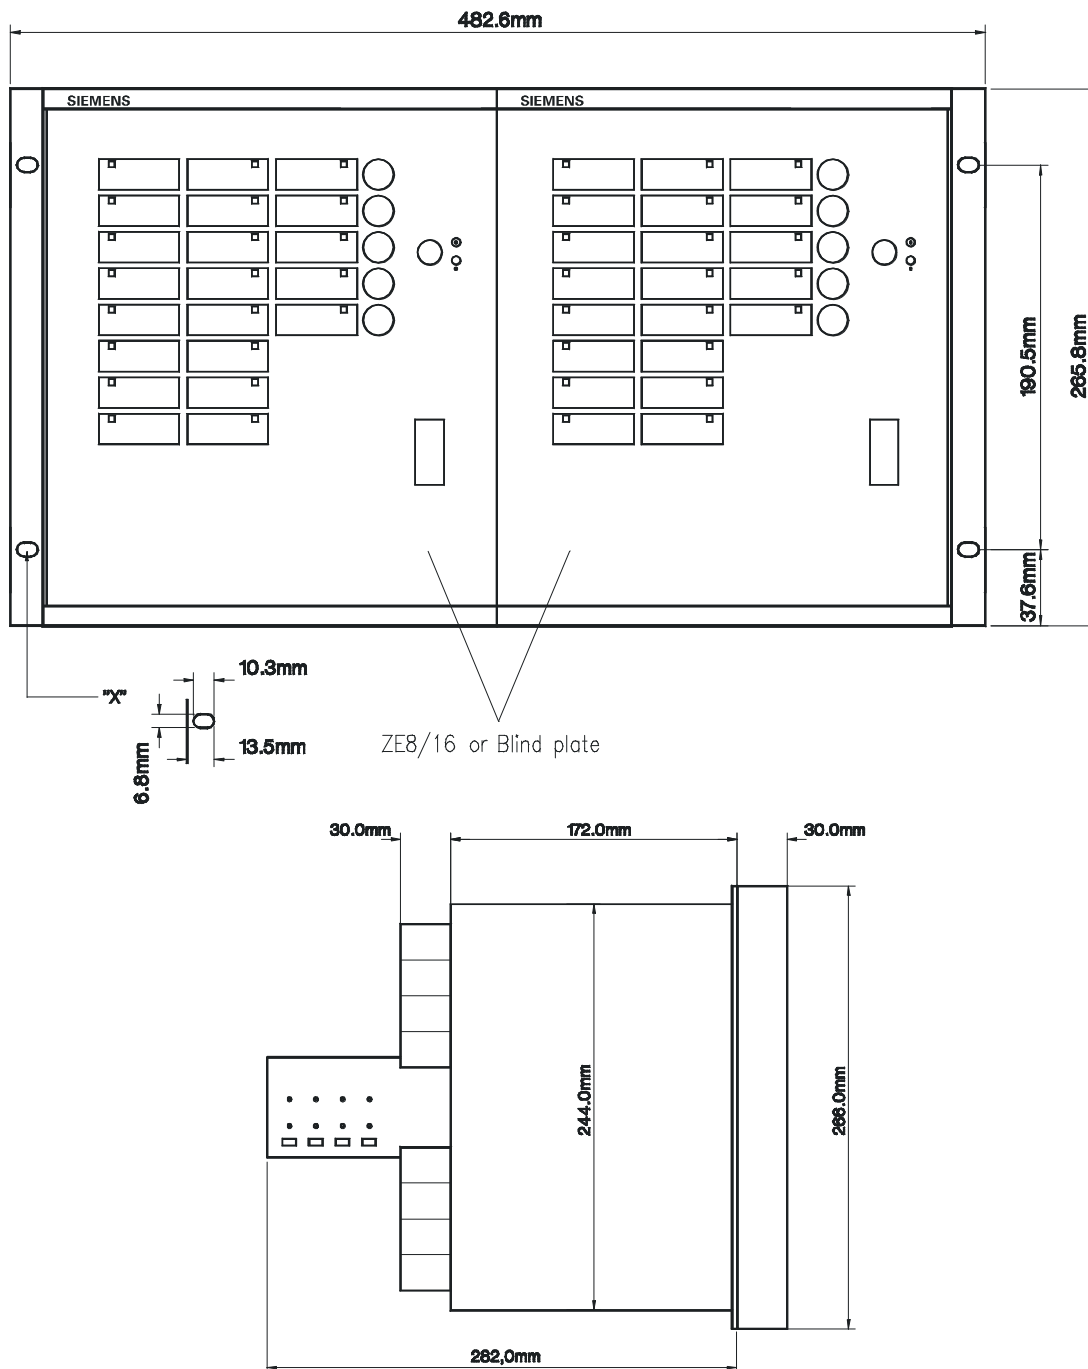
Dimensional drawing, 19-inch frame; ZE 8/16
